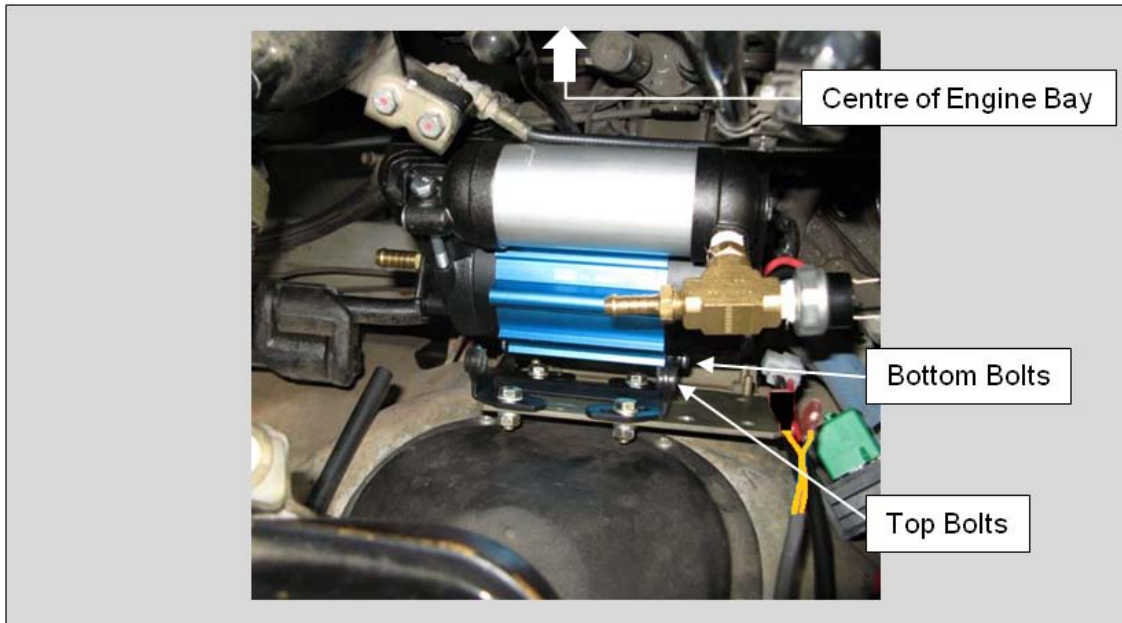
ARB CKMA12 Compressor with Brass Fittings
